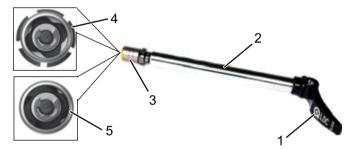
Quick release, version II, with clamping lever (1), axle (2), setting nut (3), and detailed view of the open (4) and closed (5) flange
